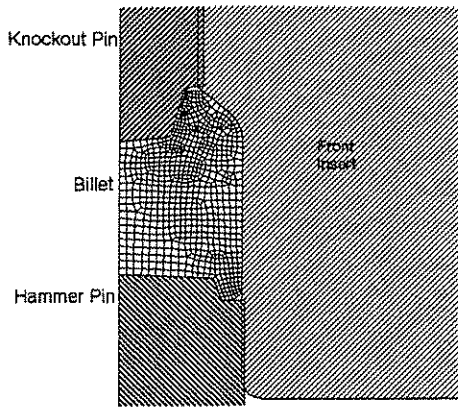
Die fill and workpiece geometry after second station (98.7%).
